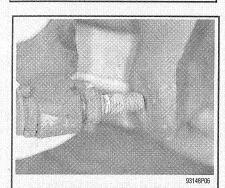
Remove the nut and slide the bolt out of the lower mounting ear
